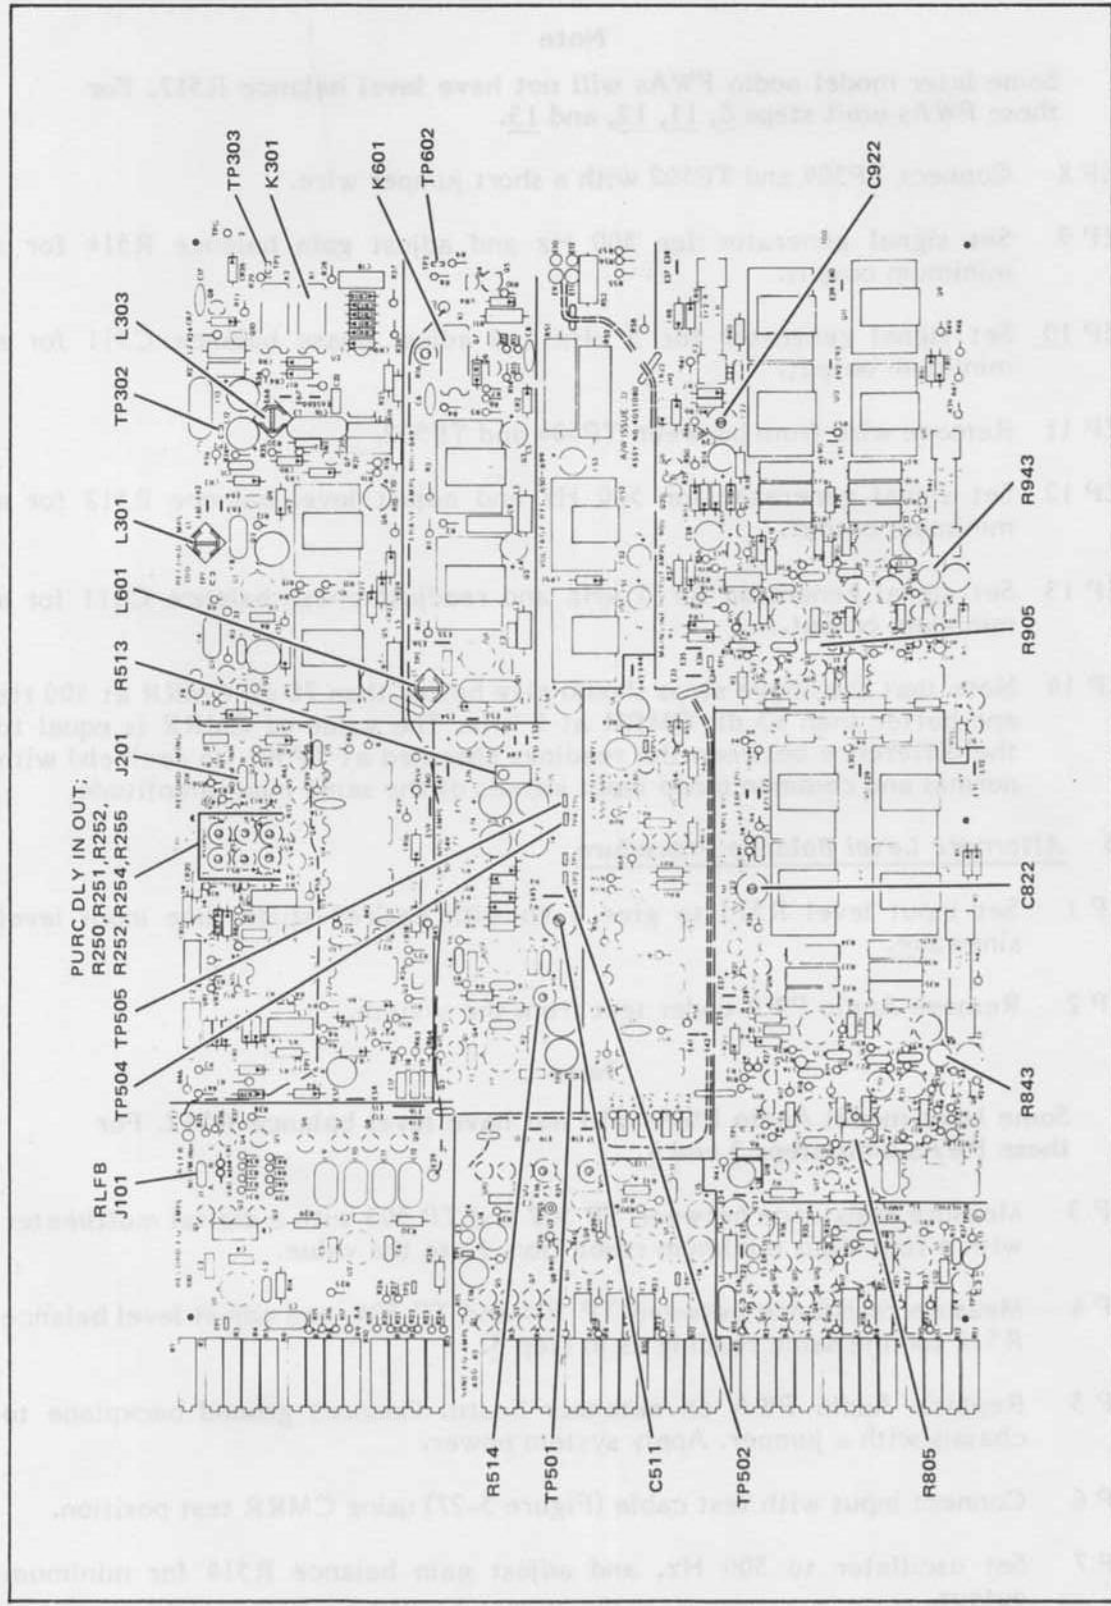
Audio PWA Assembly No. 4051080 Adjustments, Jumpers, and Test Points
